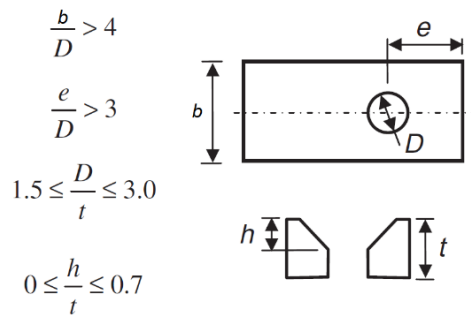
Specimen dimensions for bearing failure mode, [23]
